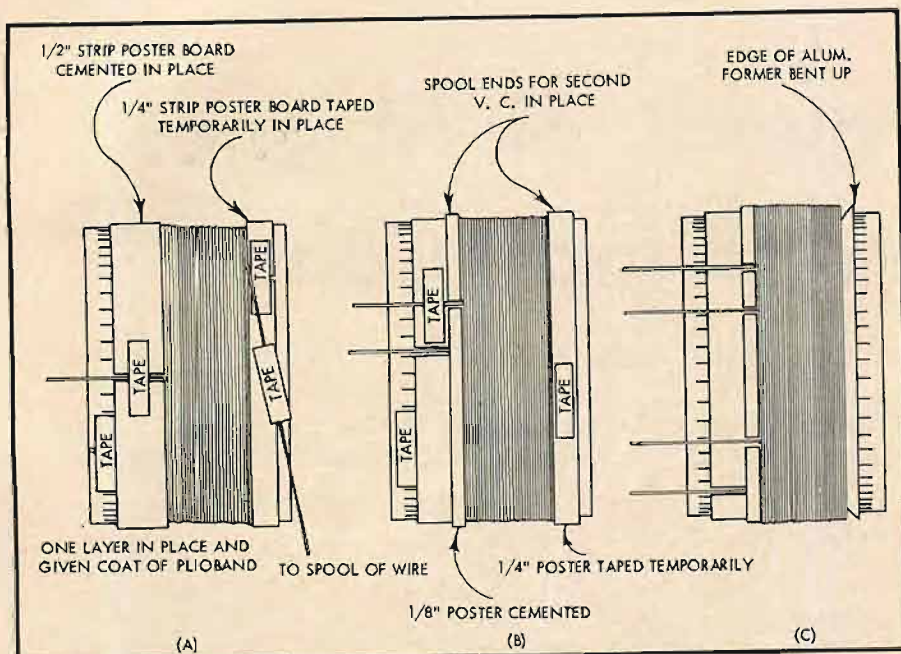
First layer completed, (A); second layer completed, (B); second winding completed with tapes removed, (C).
